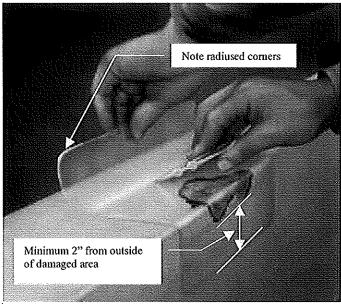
Patch Application: Use round, oval or piece with radiused corners
